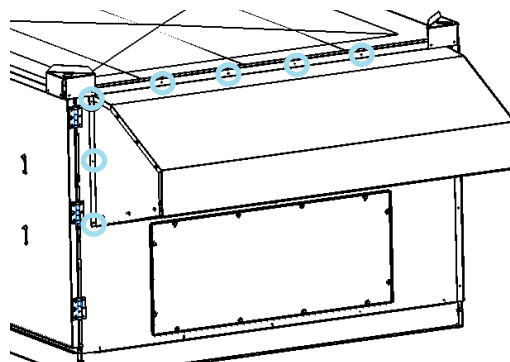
OUTSIDE AIR HOOD (TYPICAL)
